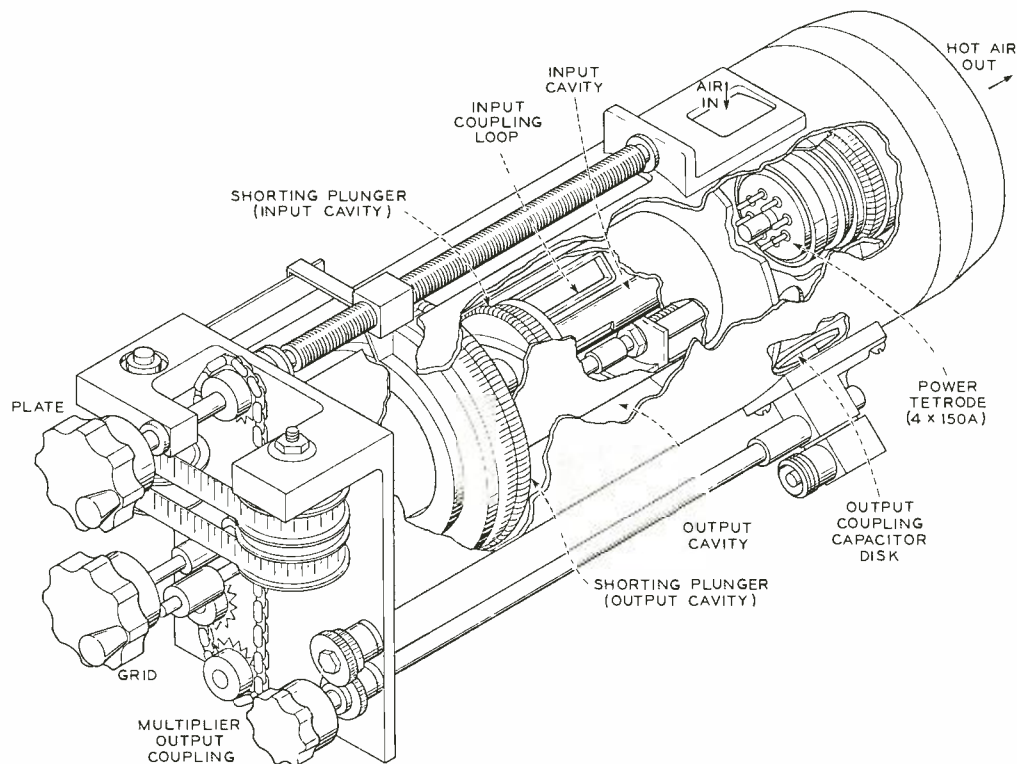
Cutaway view of the multiplier half of the 225- to 400-mc tuning unit, showing "folded back" arrangement of coaxial cavities.
